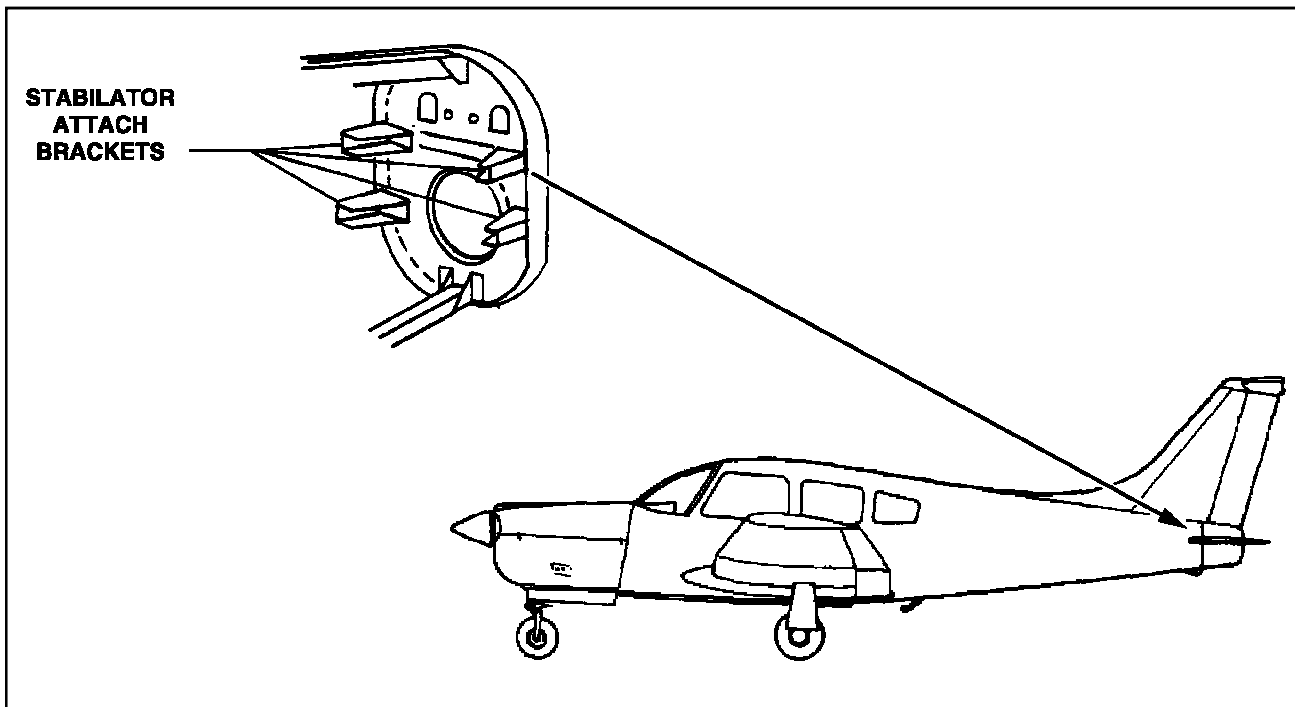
Stabilator Attach Fitting Corrosion Inspection
